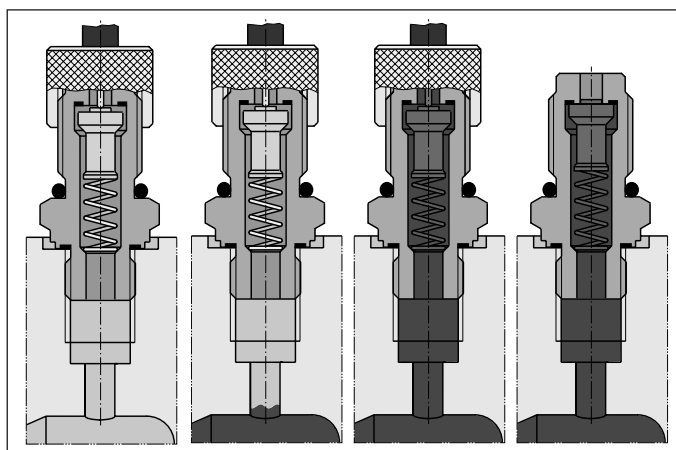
Filling and bleeding hydraulic cylinders with measuring coupling
